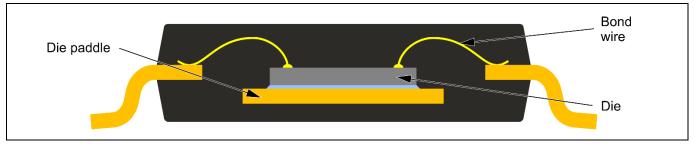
Schematic showing the inner setup of a gullwing leaded package without exposed pad.
